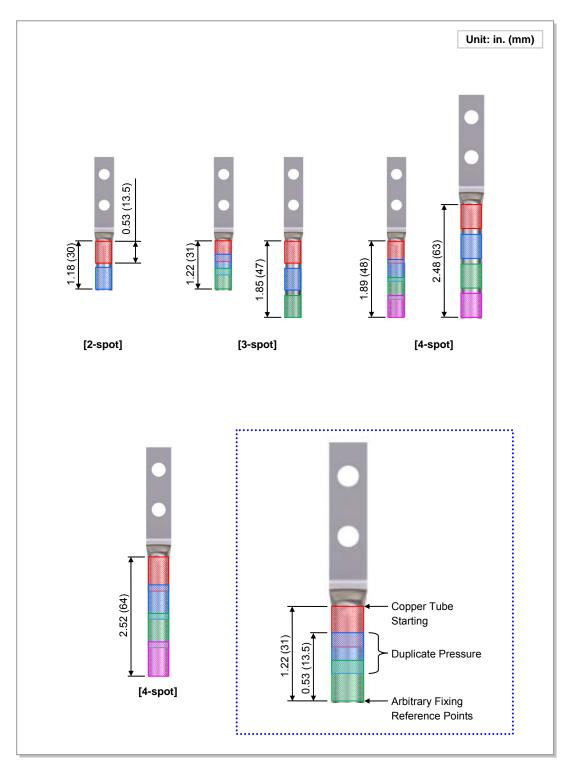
Pressure Reference Drawing (Hydraulic Press)
